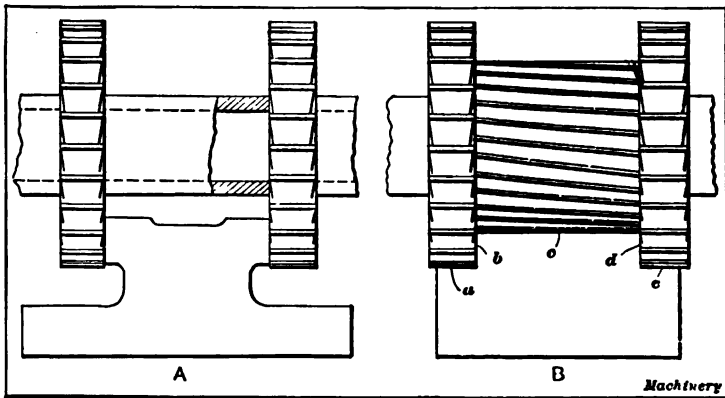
(A) Straddle Milling. (B) Gang Milling
